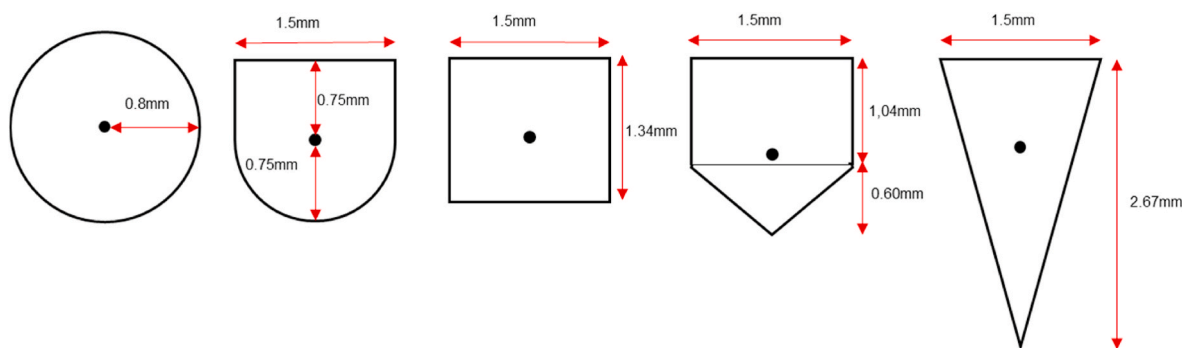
Nominal dimensions of the different cross-sectional geometries of the spirally-shaped 3D-printed CL flow cells.
